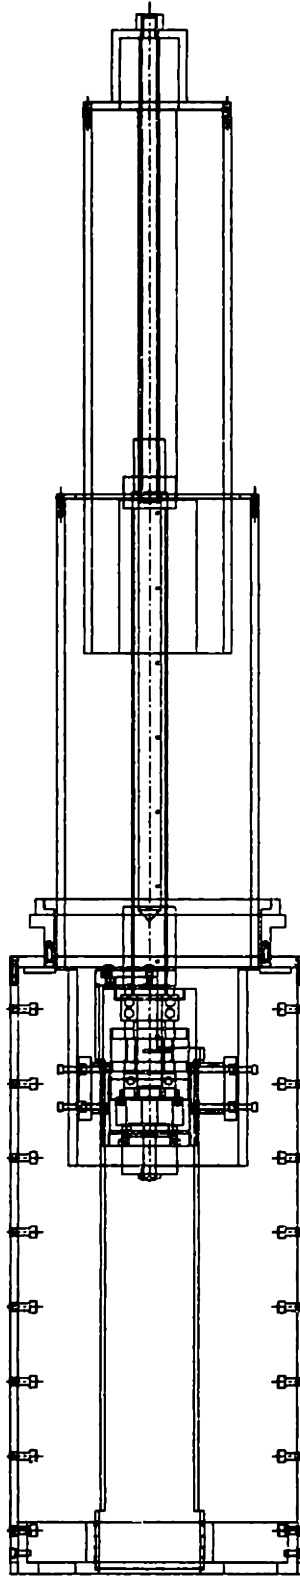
Fully extended telescoping axis. (Shown without linear bearings.)
